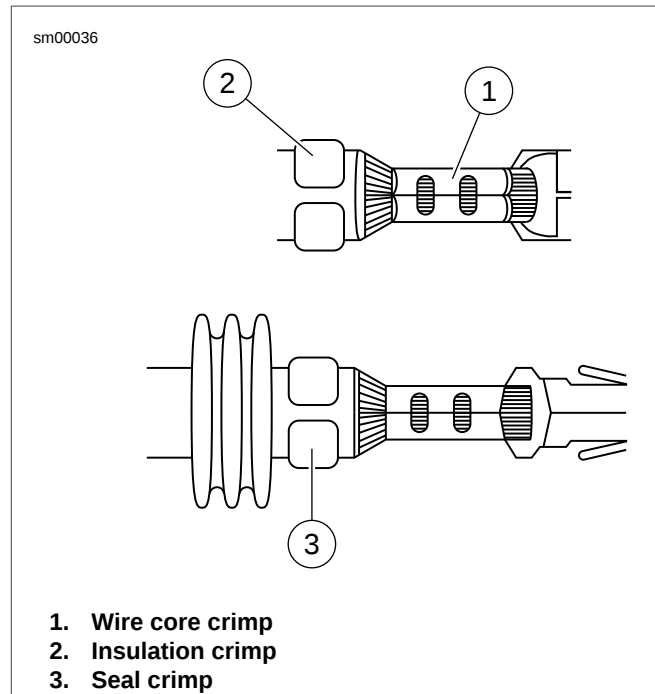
Metri-Pack Connector: Inspect Core and Insulation/Seal Crimps
